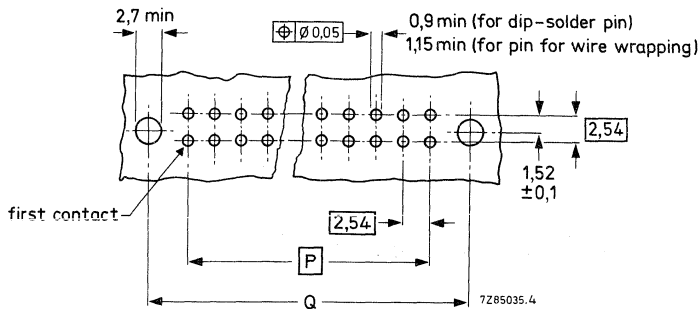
Hole pattern for male headers with straight dip-solder pins or straight pins for wire wrapping; for dimensions P and Q, see Table 7. Fixing of the male headers can be done by means of M2 screws and nuts. Mounting is only possible when the clamp/ejectors are not inserted.
